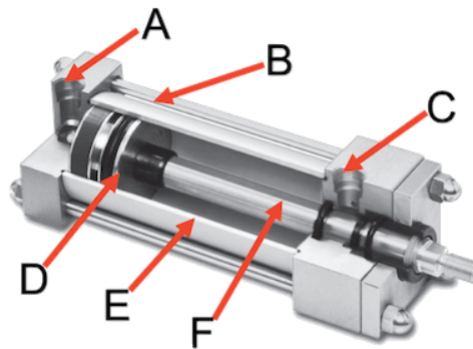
Double-acting pneumatic cylinder parts (TAMESON, 2022)
